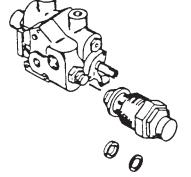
RELIEF VALVE ADJUSTMENT
